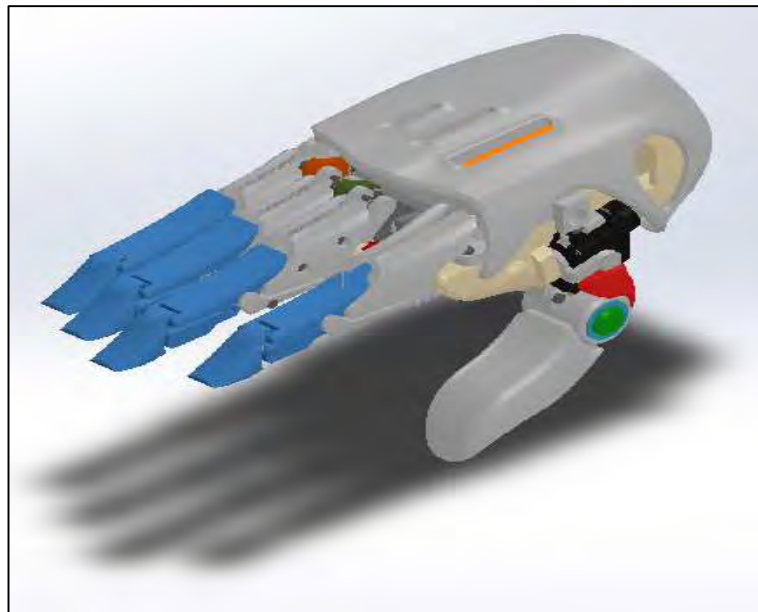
The prototype of finger design and assembly the whole hand design.
